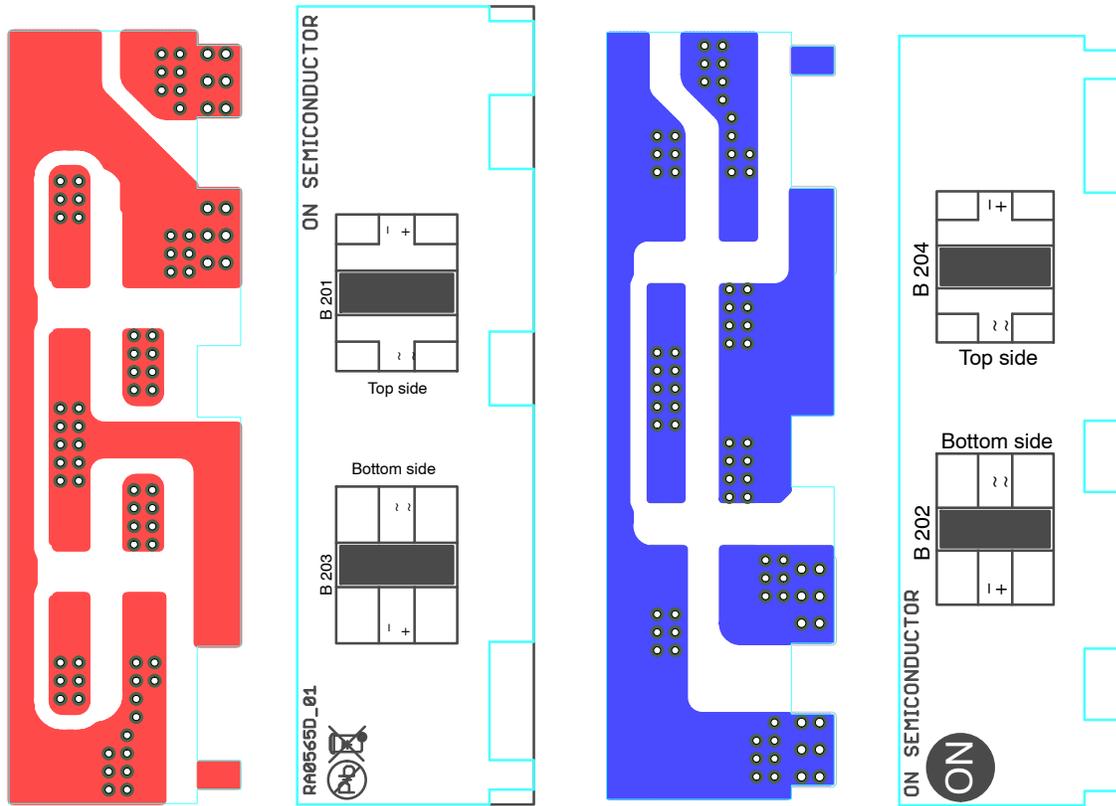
Top/ Bottom Layer PCB Layout and Assembly Plan of BRIDGE RECTIFIER MODULE MOD101
